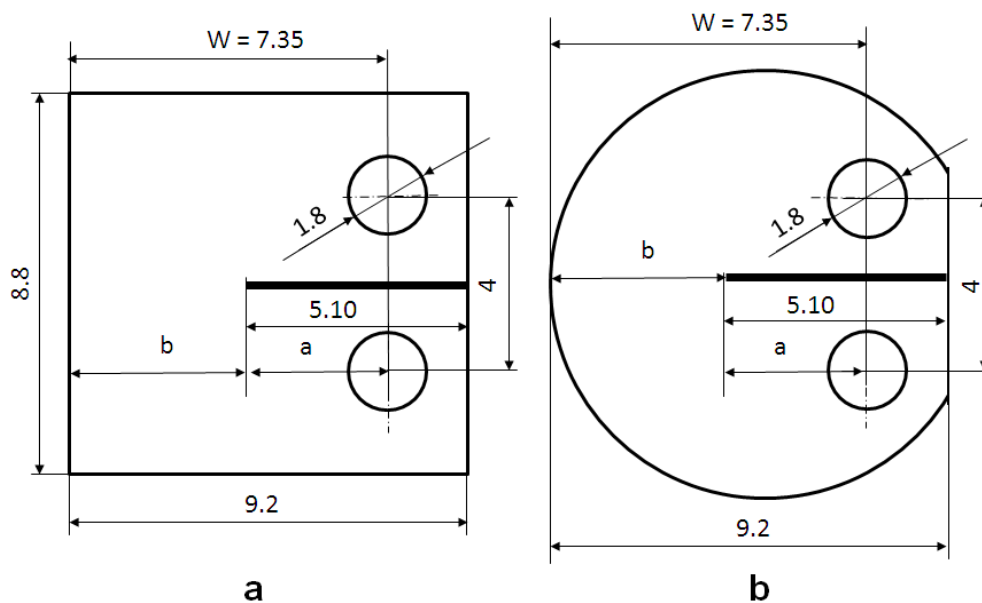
Drawing of fracture specimens: (a) R-L specimen; (b) C-R specimen. Specimen thickness is $B=3.7$ mm.
